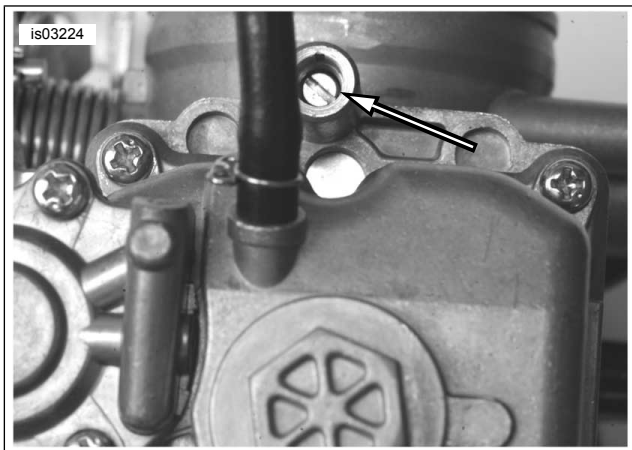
Idle Mixture Screw (IMS) Location (viewed from carburetor bottom)
